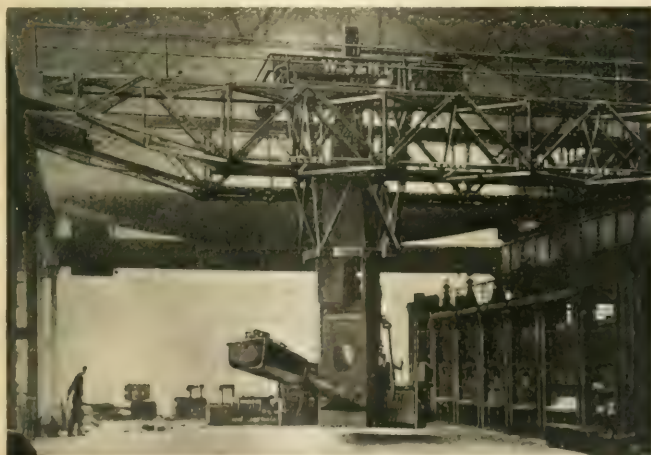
OVERHEAD REVOLVING OPEN HEARTH CHARGING MACHINE.
